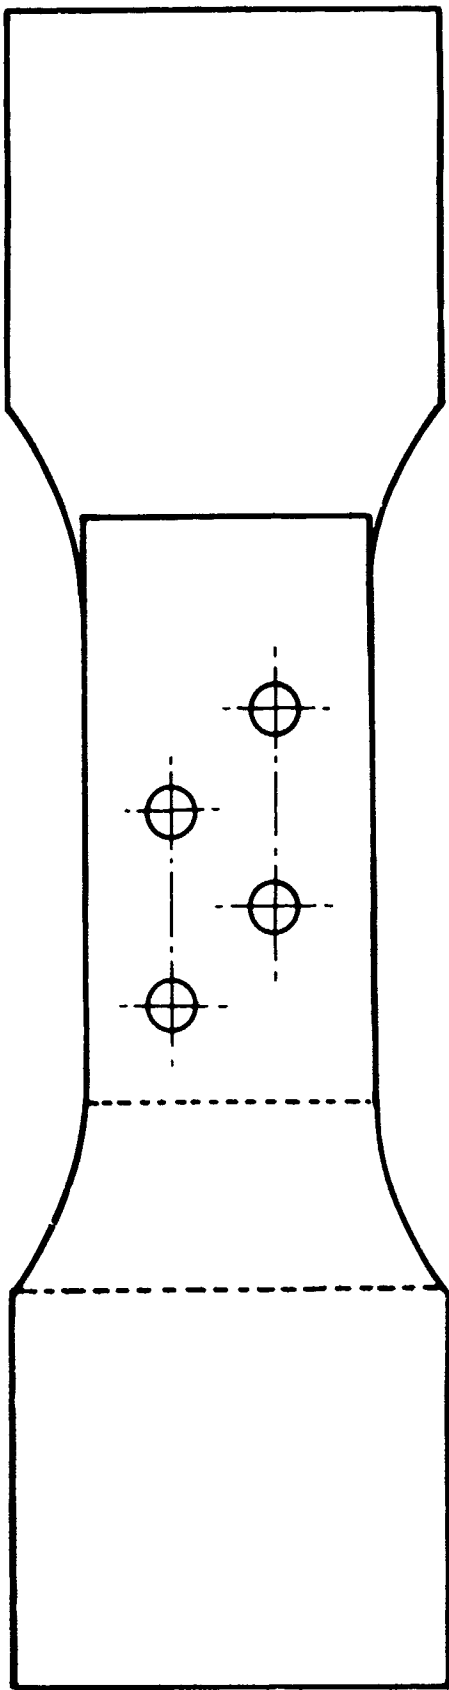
Typical Fatigue Failure of Control Specimen
